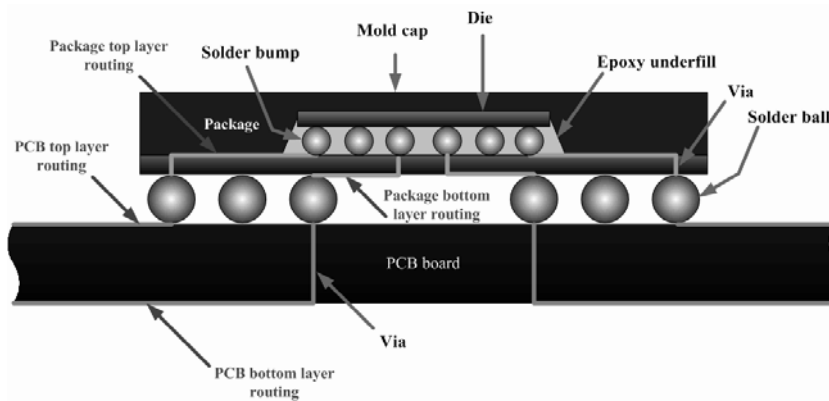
The cross-section of a flip-chip package which is mounted on PCB board [1].
